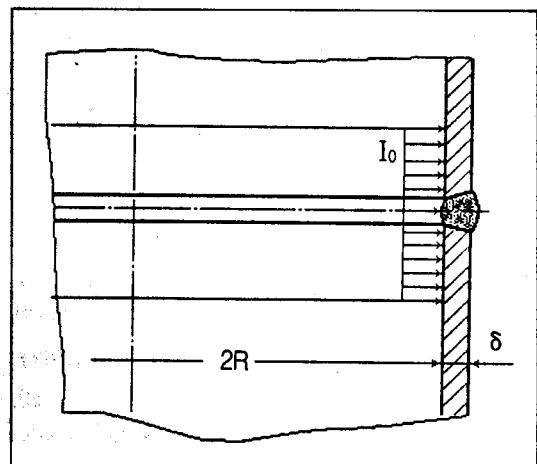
Principal scheme of explosion treatment of circumferential welds in axisymmetrical metal structures : R-shell radius: δ -shell wall thickness : I_0 -explosion pulse.
